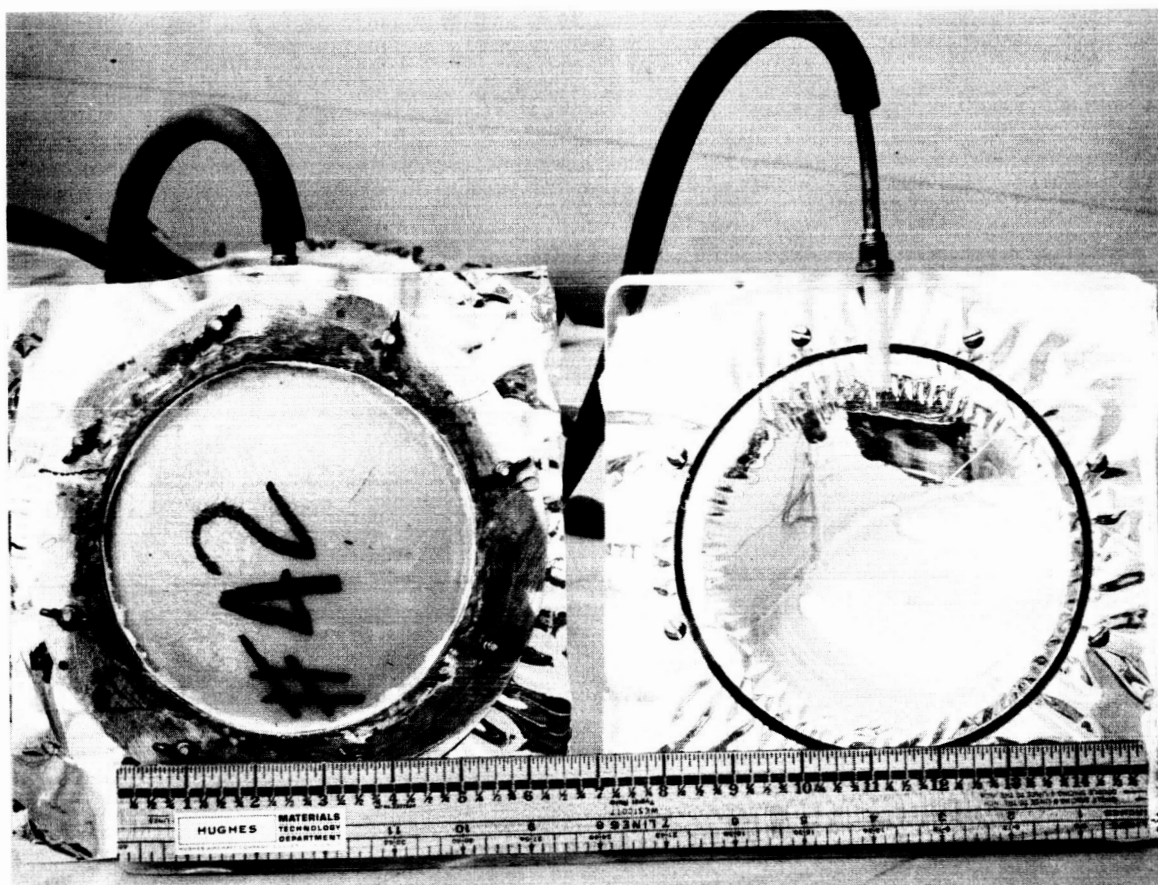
Transparent six inch diameter fixtures, showing both surfaces of part.
